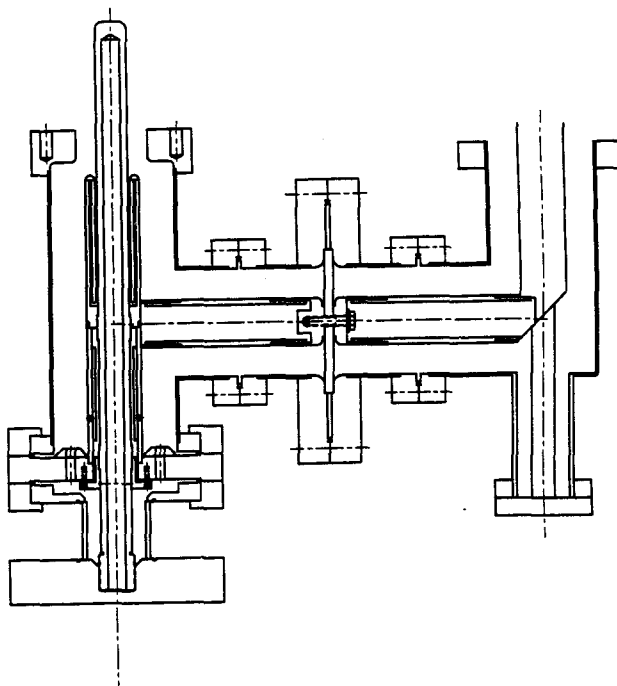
Drawing of a coaxial window and coupler assembly, that uses a choke joint to allow adjustment.
